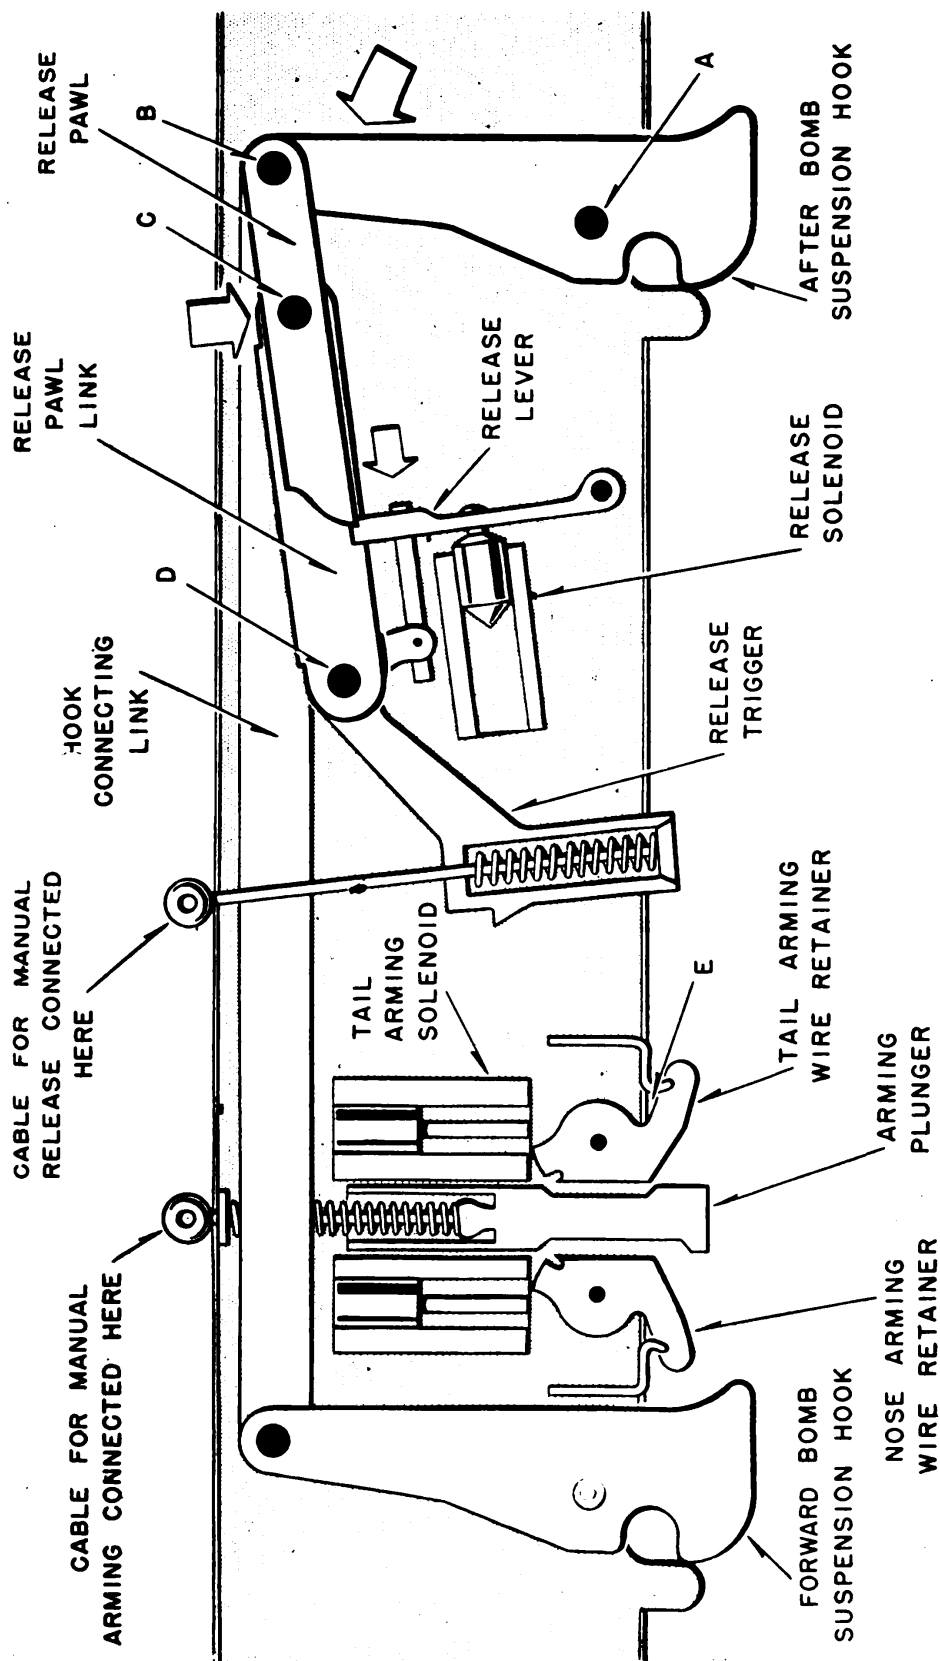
This drawing, which omits some details, shows how a Mk 51 bomb rack works.
